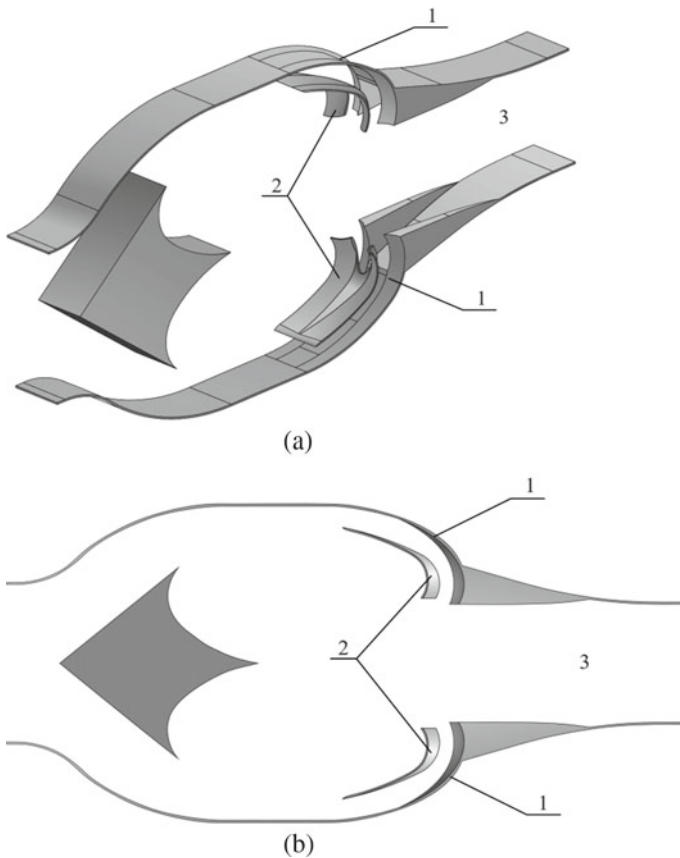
Vortex combustion chamber with corner flame stabilizer and continuous outlet: a axonometric projection; b side projection; 1—combustion chamber walls; 2—separating surface of the gas manifold; 3—outlet line
